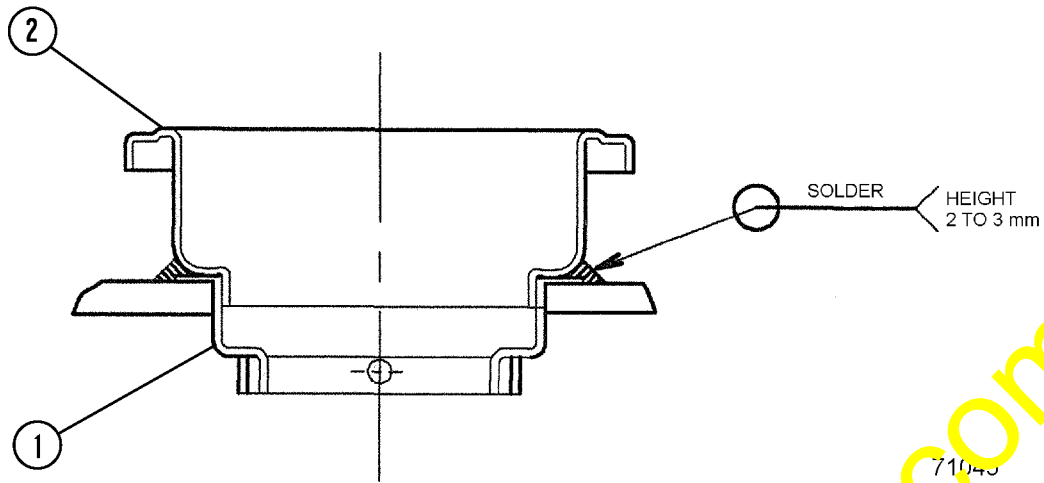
SOLDER NECK ASSEMBLY TO TANK
